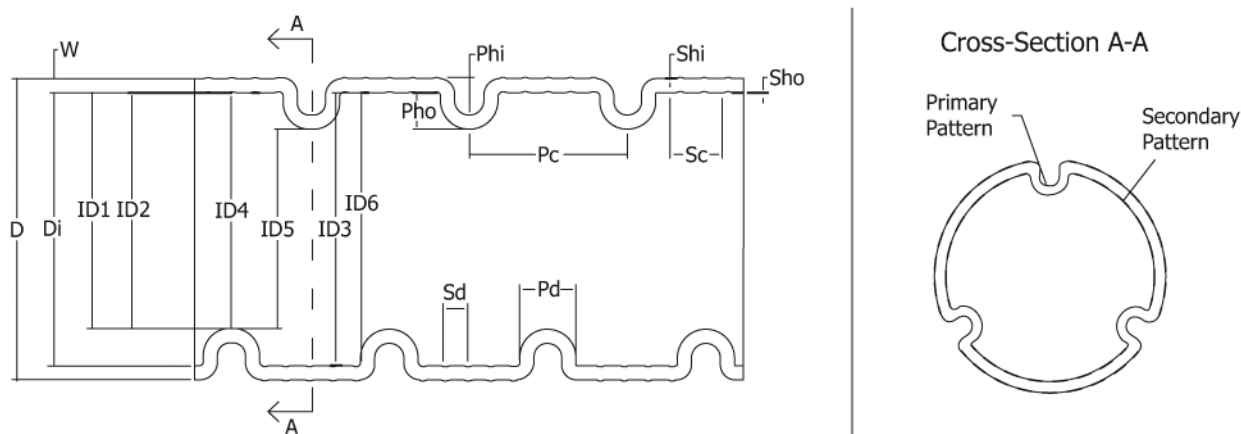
Views of Representative Textured Tube Showing Variables that Describe Possible Primary and Secondary Texturizations that May be Applied to Inside Surface of Tube, Outside Surface of Tube, or Both Inside and Outside Surfaces of Tube
